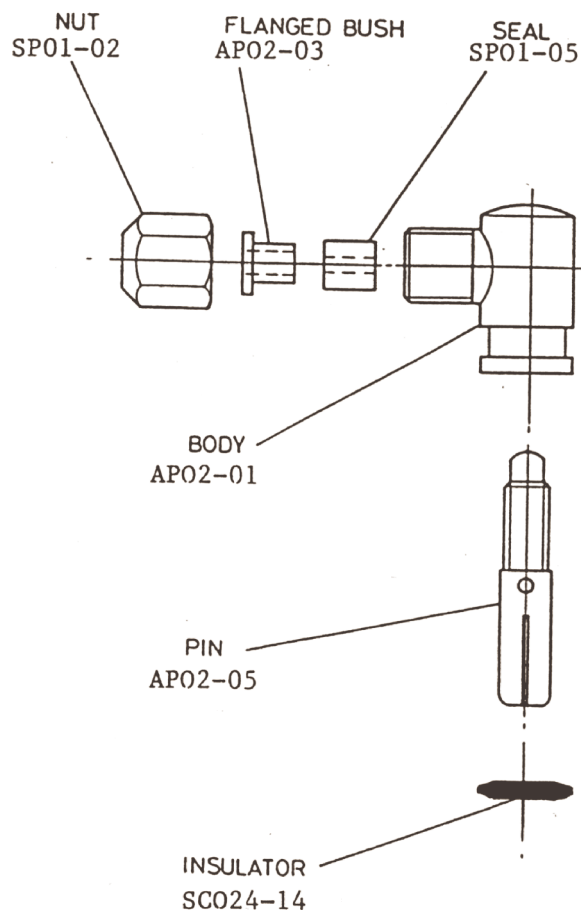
ANGLE PLUG ASSEMBLY AP02
